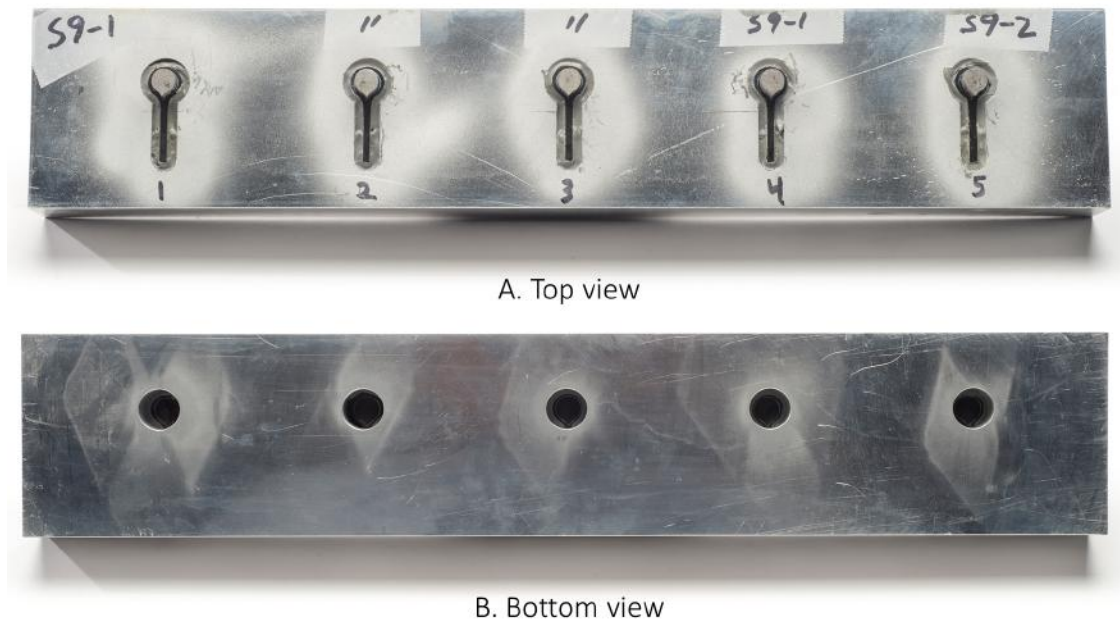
Stringer rod push-out specimens potted in the aluminum tool.
